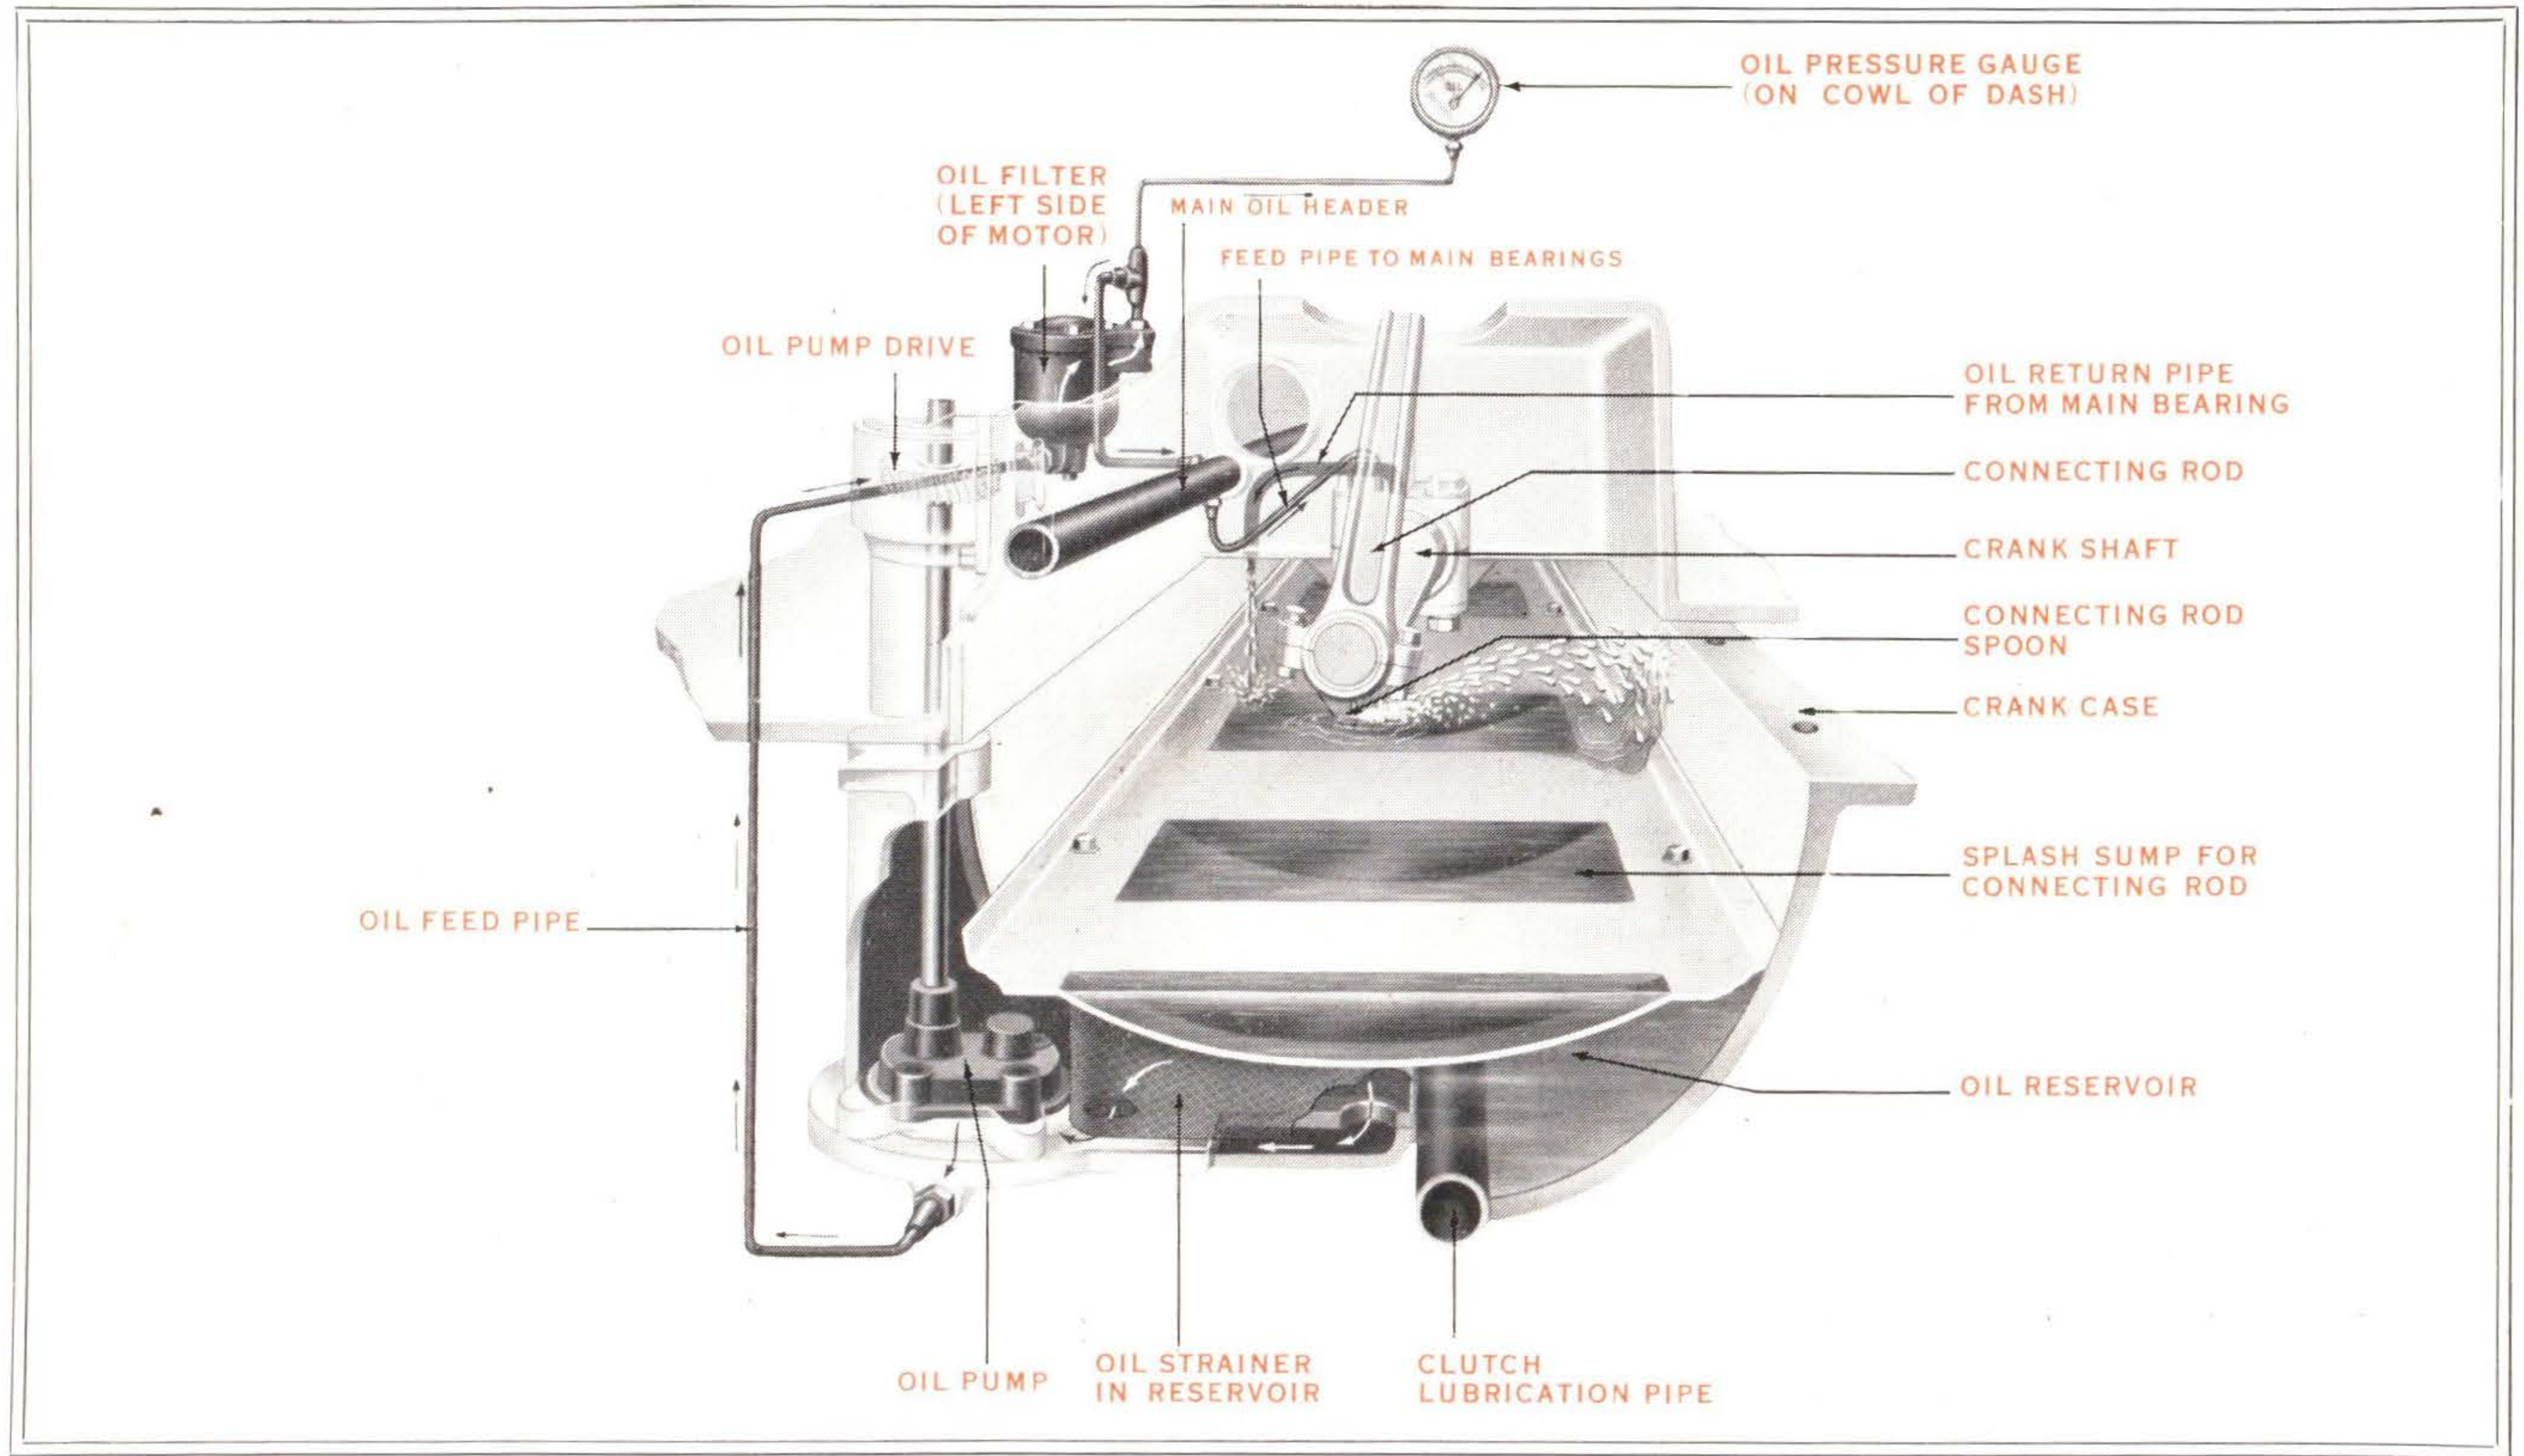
Motor Lubrication System of the Chalmers "Master Six" (Model 29) ,
